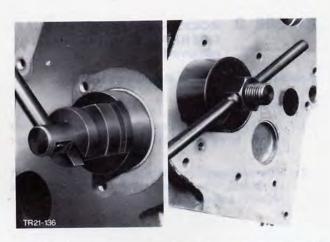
Withdraw bearing bush No. 5 from front using Special Tool 21–022–01/02
